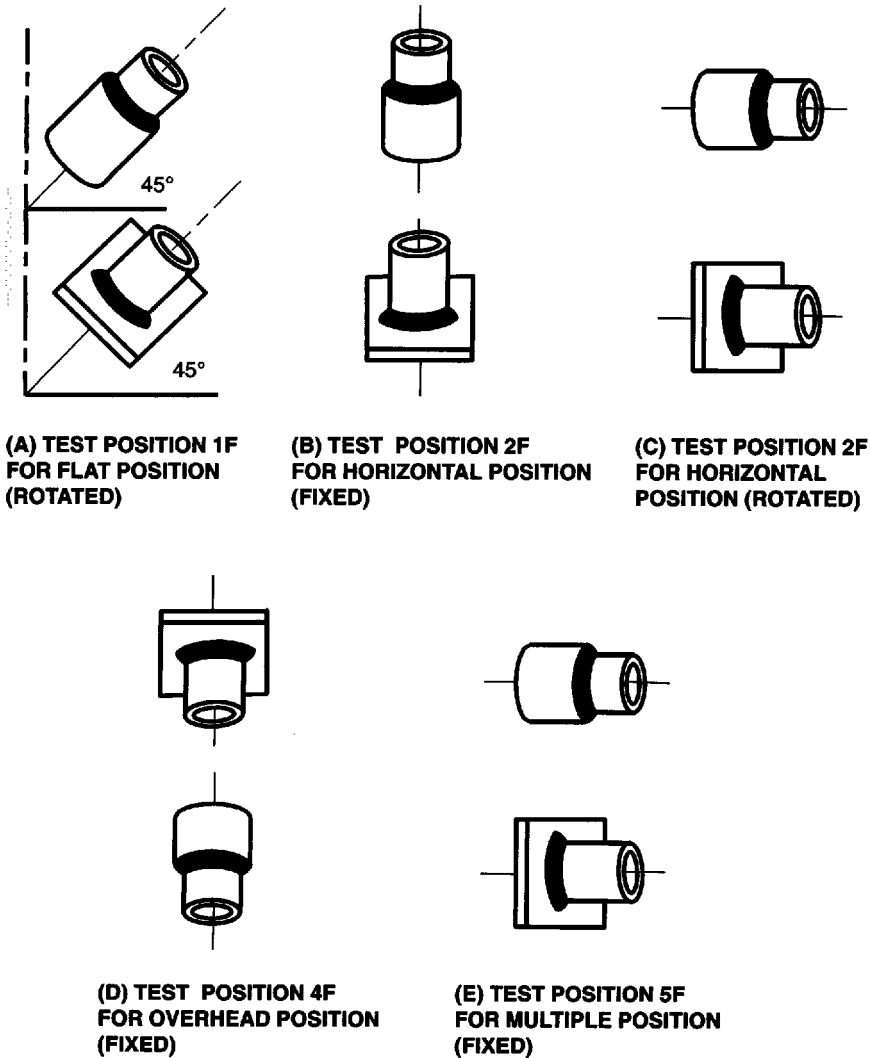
Positions of Test Pipes for Fillet Welds
